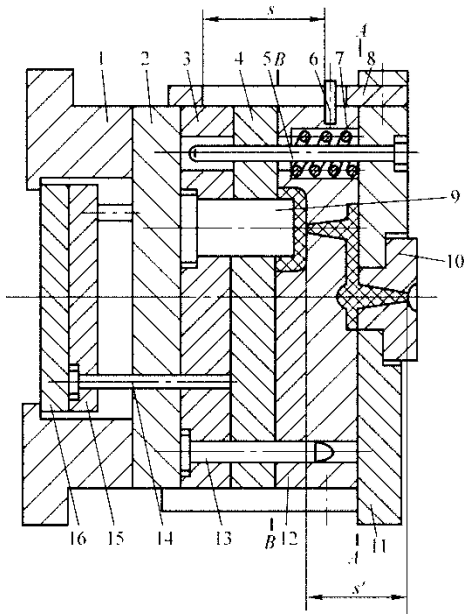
Injection mold with double parting surfaces 1-Mold leg 2-Bearing plate 3-Movable mold plate 4-Stripper plate 5-Guide pillar 6-Spacer pin 7-Spring 8-Puller plate 9-Male mold 10-Sprue bush 11-Fixed mold plate 12-Intermediate plate 13-Guide pillar 14-Ejector pin 15-Ejector pin retaining plate 16-Ejector plate
